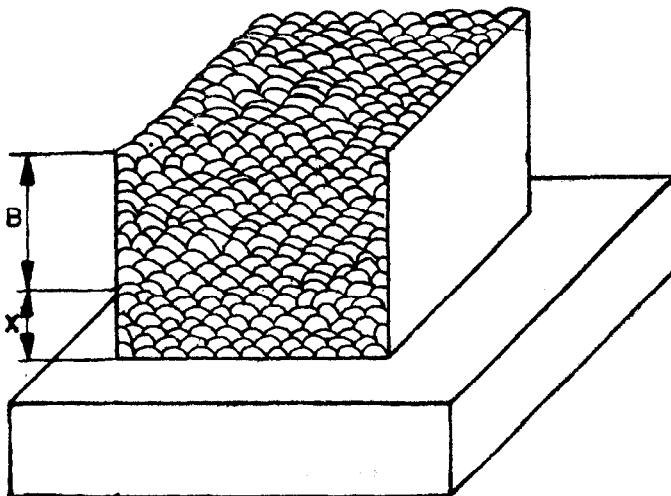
WELD PAD FOR CHEMICAL ANALYSIS
